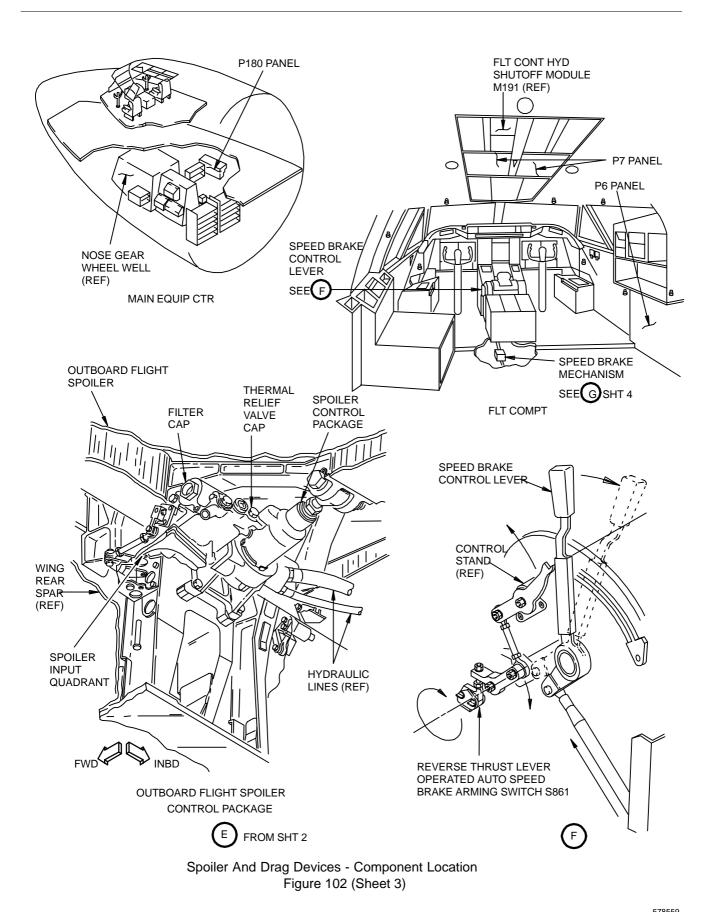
27-60 Spoiler and Drag Devices Comp. Location Fig. 102 (Sheet 3)
